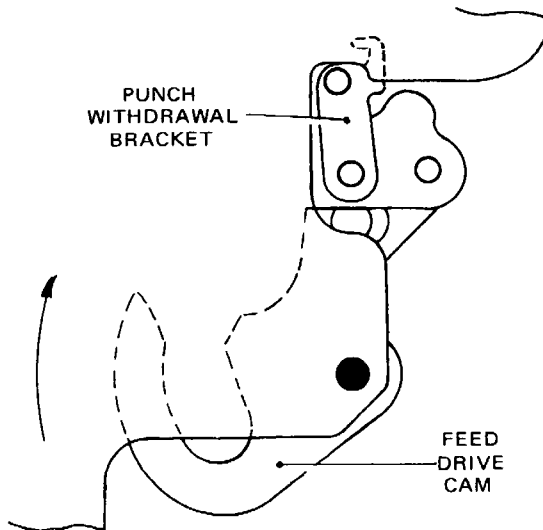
DRIVE ARM ASSEMBLY (UNDERSIDE)
